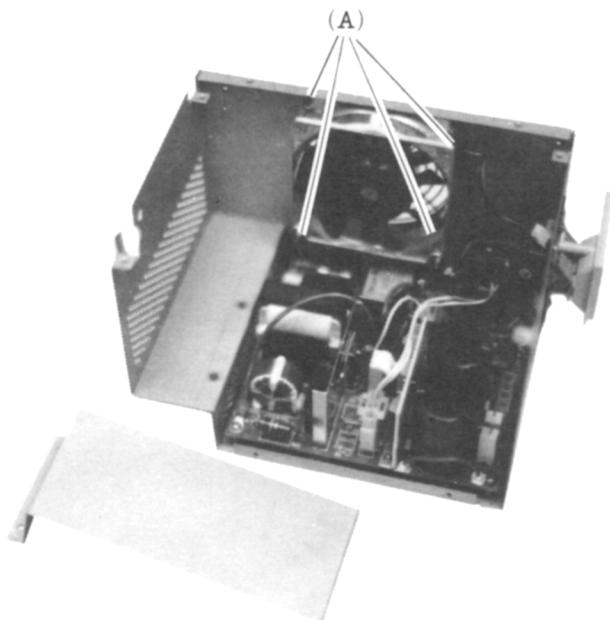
SECONDARY SIDE CIRCUIT BOARD REMOVAL/REPLACEMENT
